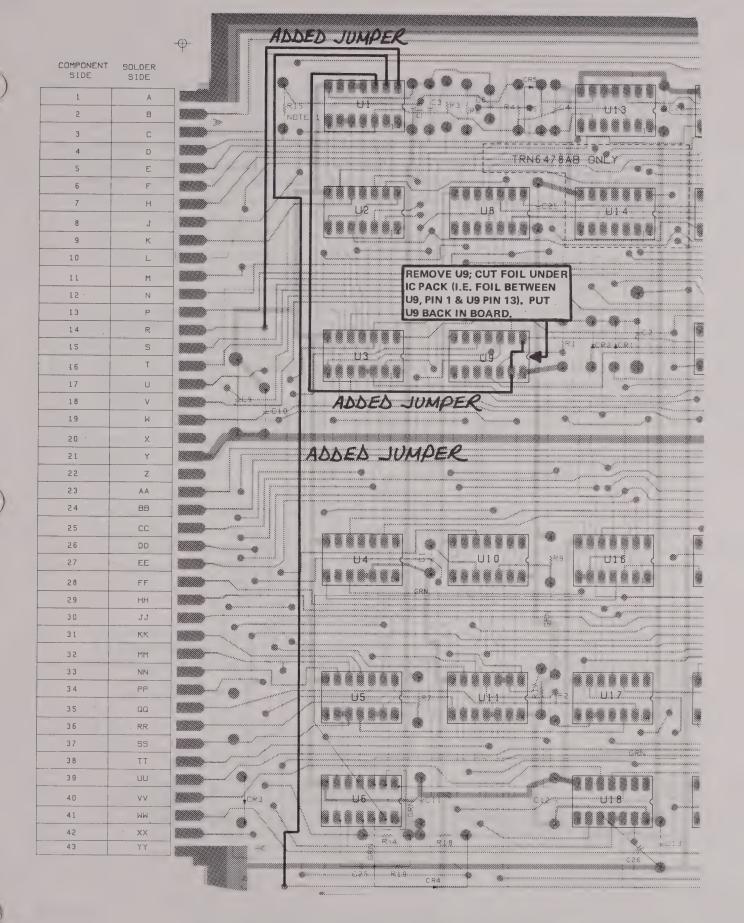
Circuit Board Detail of Crosspoint and Manual Control Board TRN6478AA/AB Showing Modification Details
